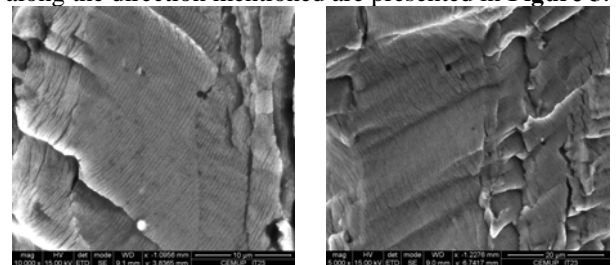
Detail of the fracture surface, specimen IT23.
